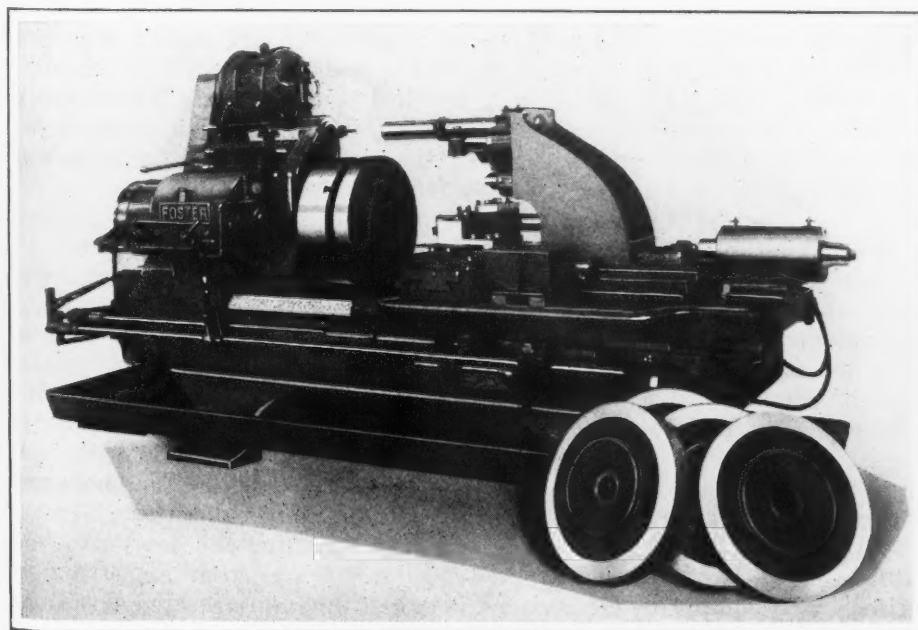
"Fastermatic" Platen-type Chucking Machine with Hydraulic Feed
